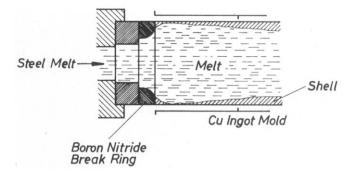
Cross-section of a mold for horizontal continuous casting.
